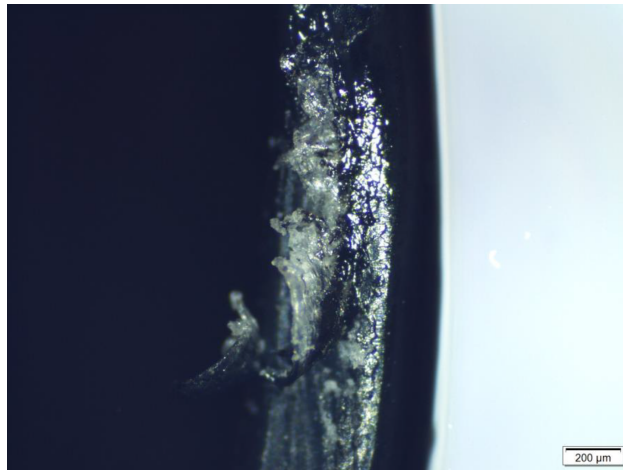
Optical microscope image of tear test fracture surface for LIRF-welded sample (necking and crazing are clearly visible).
